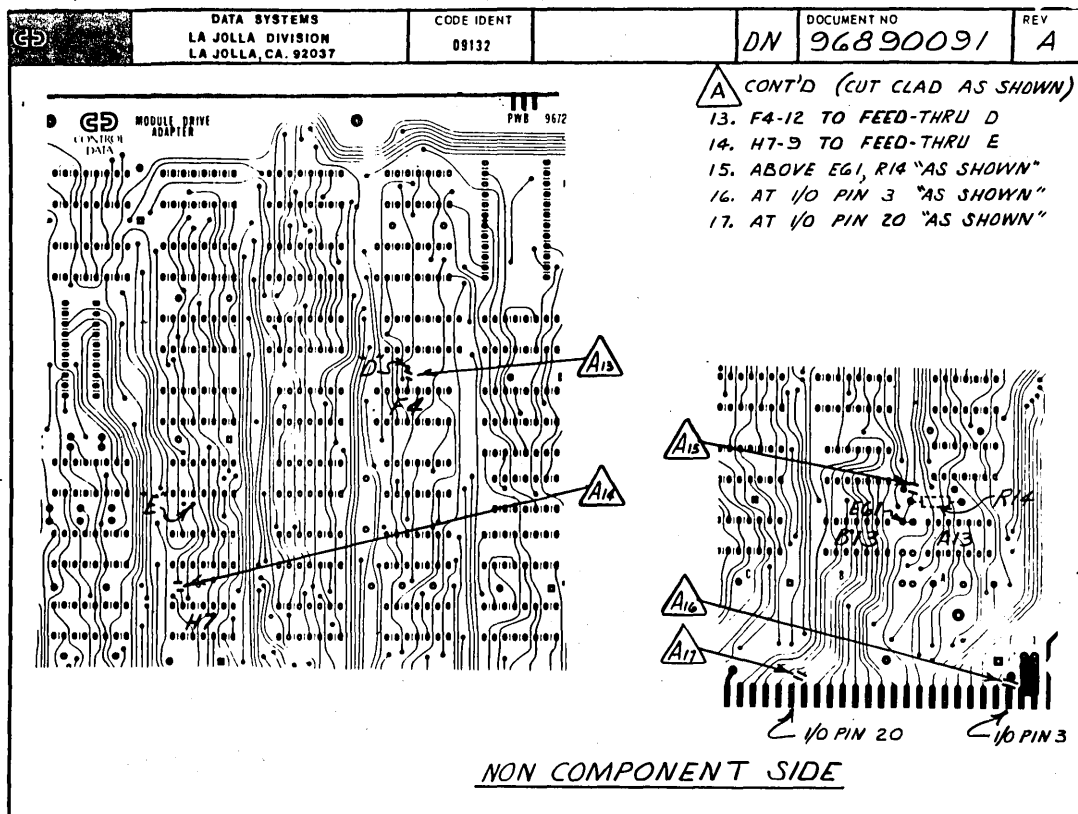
Module Drive Adapter Subassembly (96890091) (Sheet 3 of 7)
